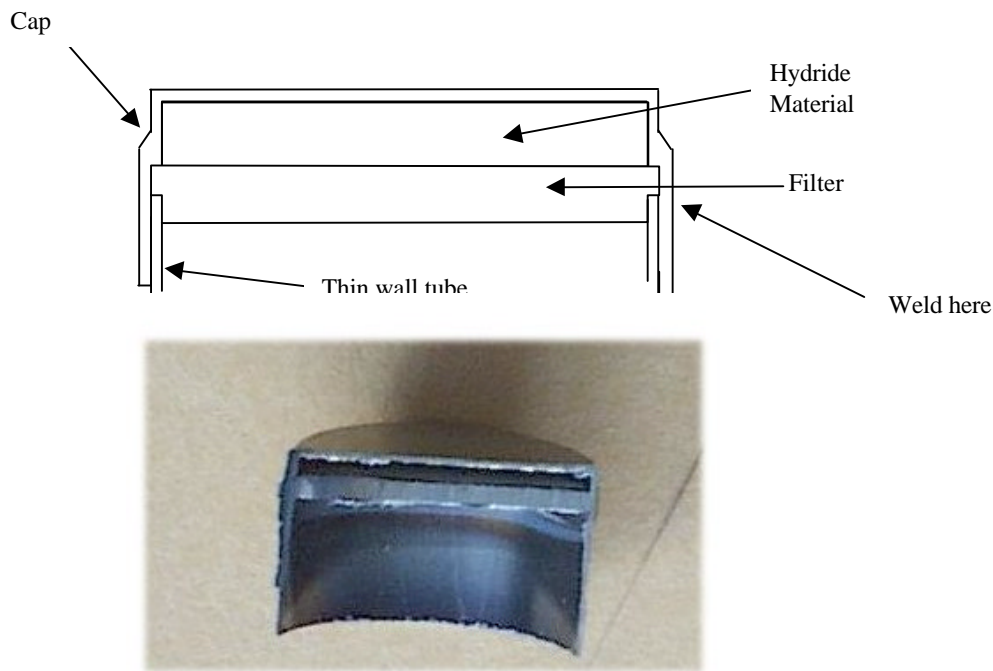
Gas Gap Actuator Assembly schematic and a section of a weld test
